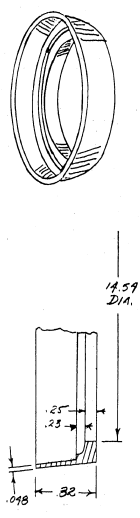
P/N 226966 - Flange, Combustion Chamber Heat Shield Assembly, Material, Ti-670
